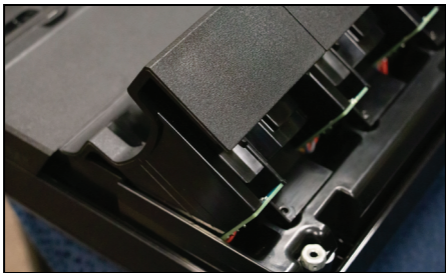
The screw hole of the pocket will align to the hole in the charger.
